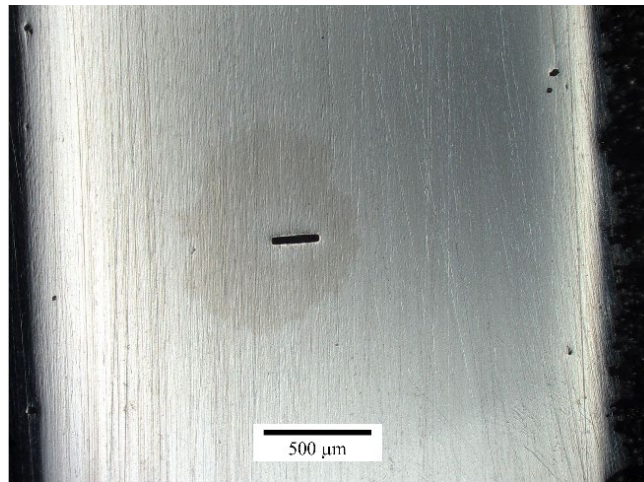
Plasma focused ion beam (PFIB) notch cut into the machined flat surface of a fatigue crack growth (FCG) test specimen.
